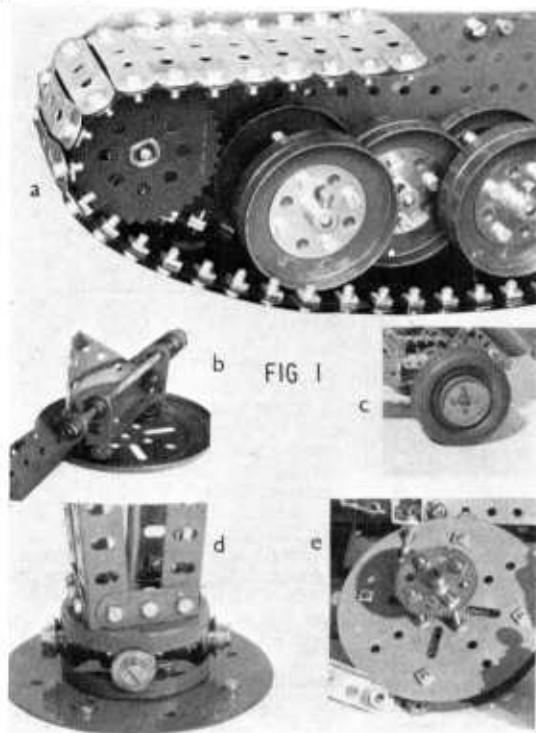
Wheel Flanges form neat running gear for model tank tracks.
